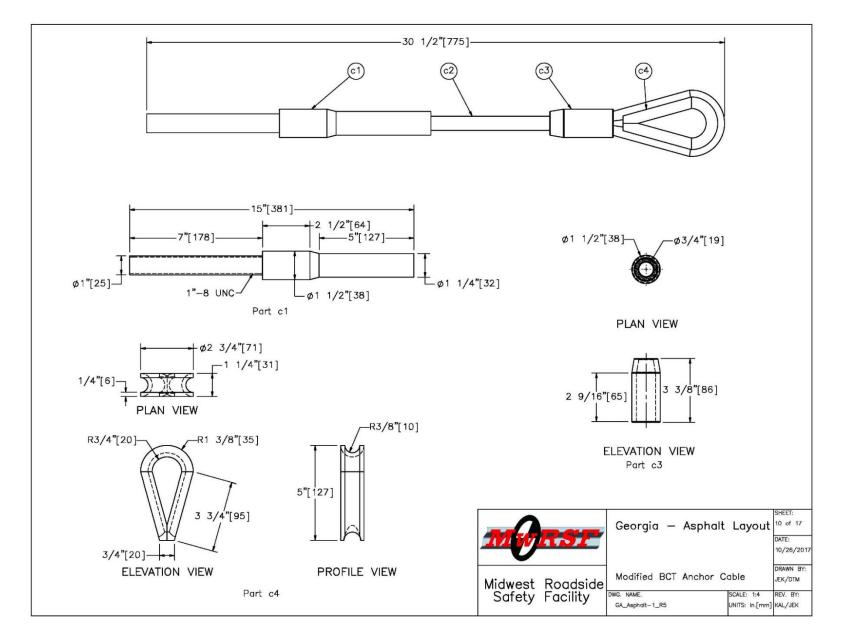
Modified BCT Anchor Cable Detail, Test No. GAA-1
